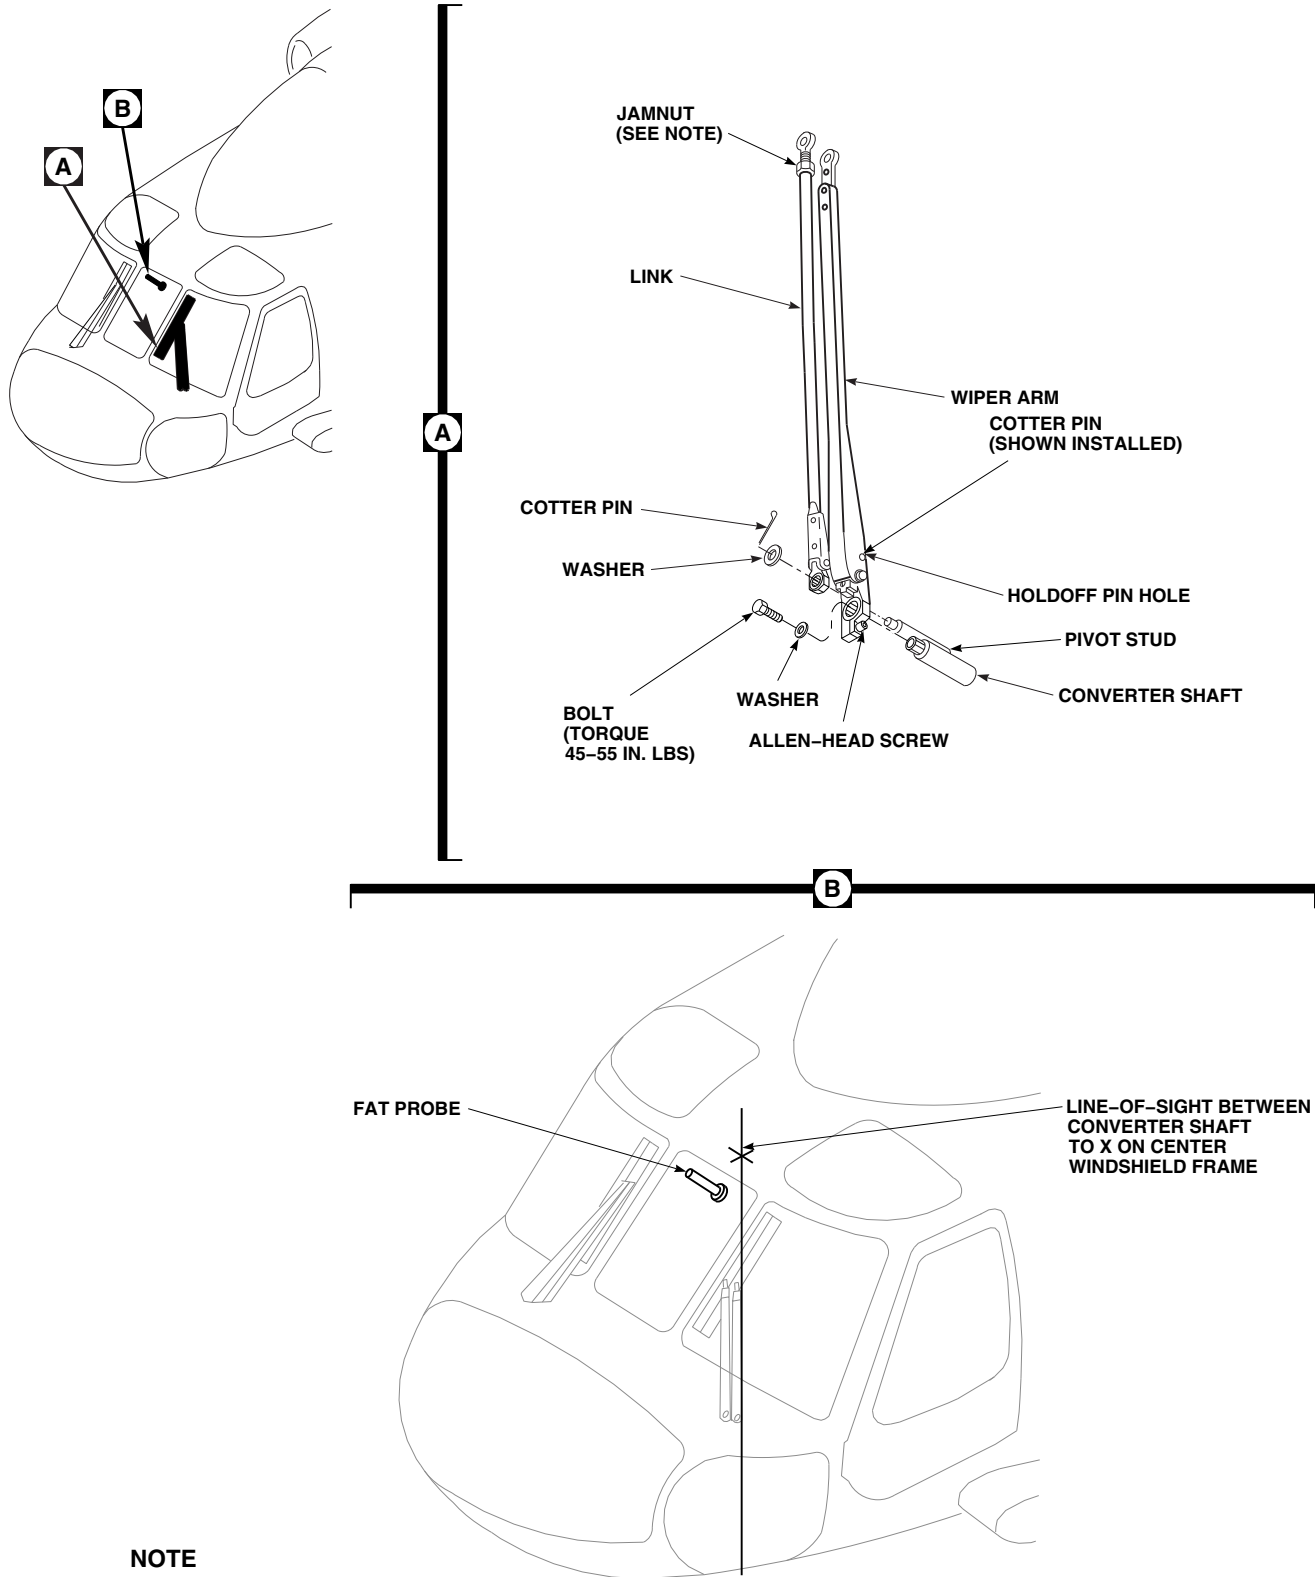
REPLACE WINDSHIELD WIPER ARM AND LINK
